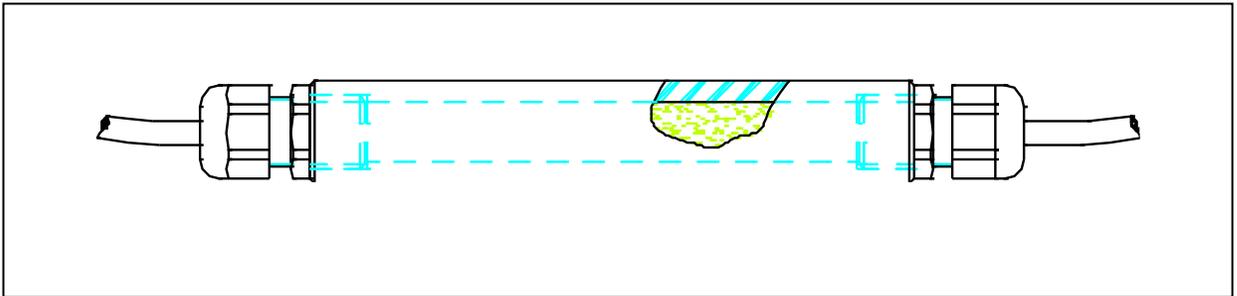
Cable splicing assembly with PVC connectors for IRC-41A cable (FR-1135050900)
